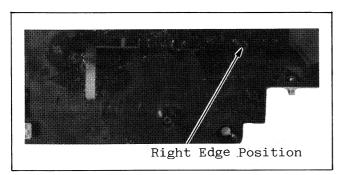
Adjustment of Cassette Up Gears-(7)
